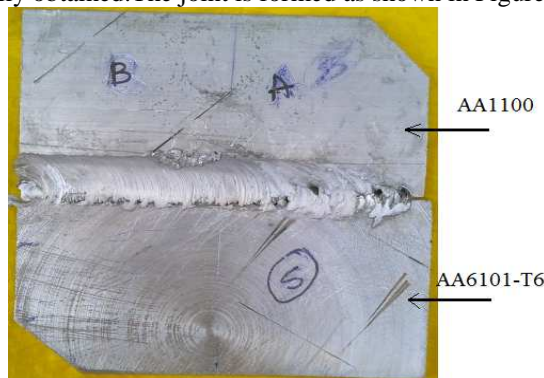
Photograph of Dissimilar joint Aluminium AA1100 and Aluminium AA6101-T6
